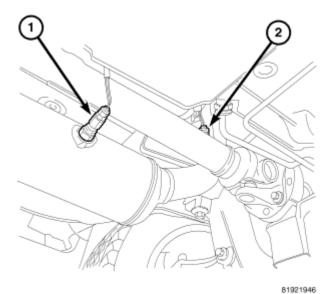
Left Side Oxygen Sensors Courtesy of CHRYSLER LLC
